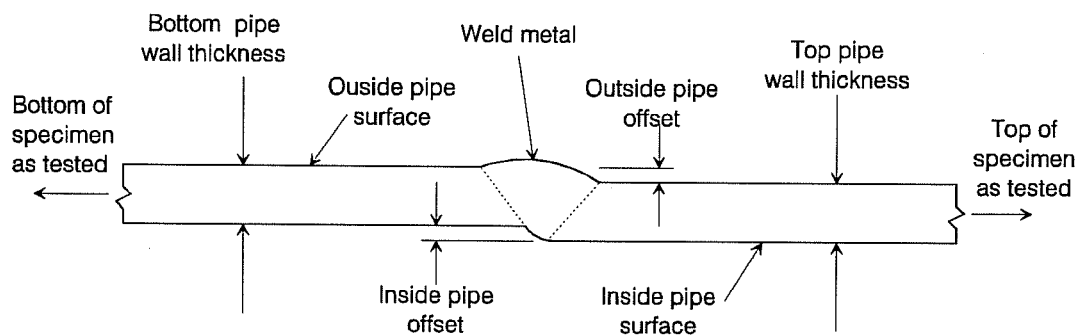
Pipe Weld Geometric Parameters
